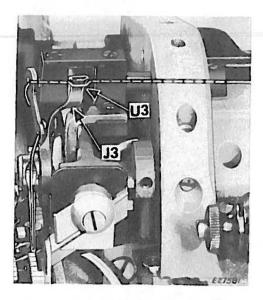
Needle Thread Controller 164151 in Correct Relation to Needle Thread
